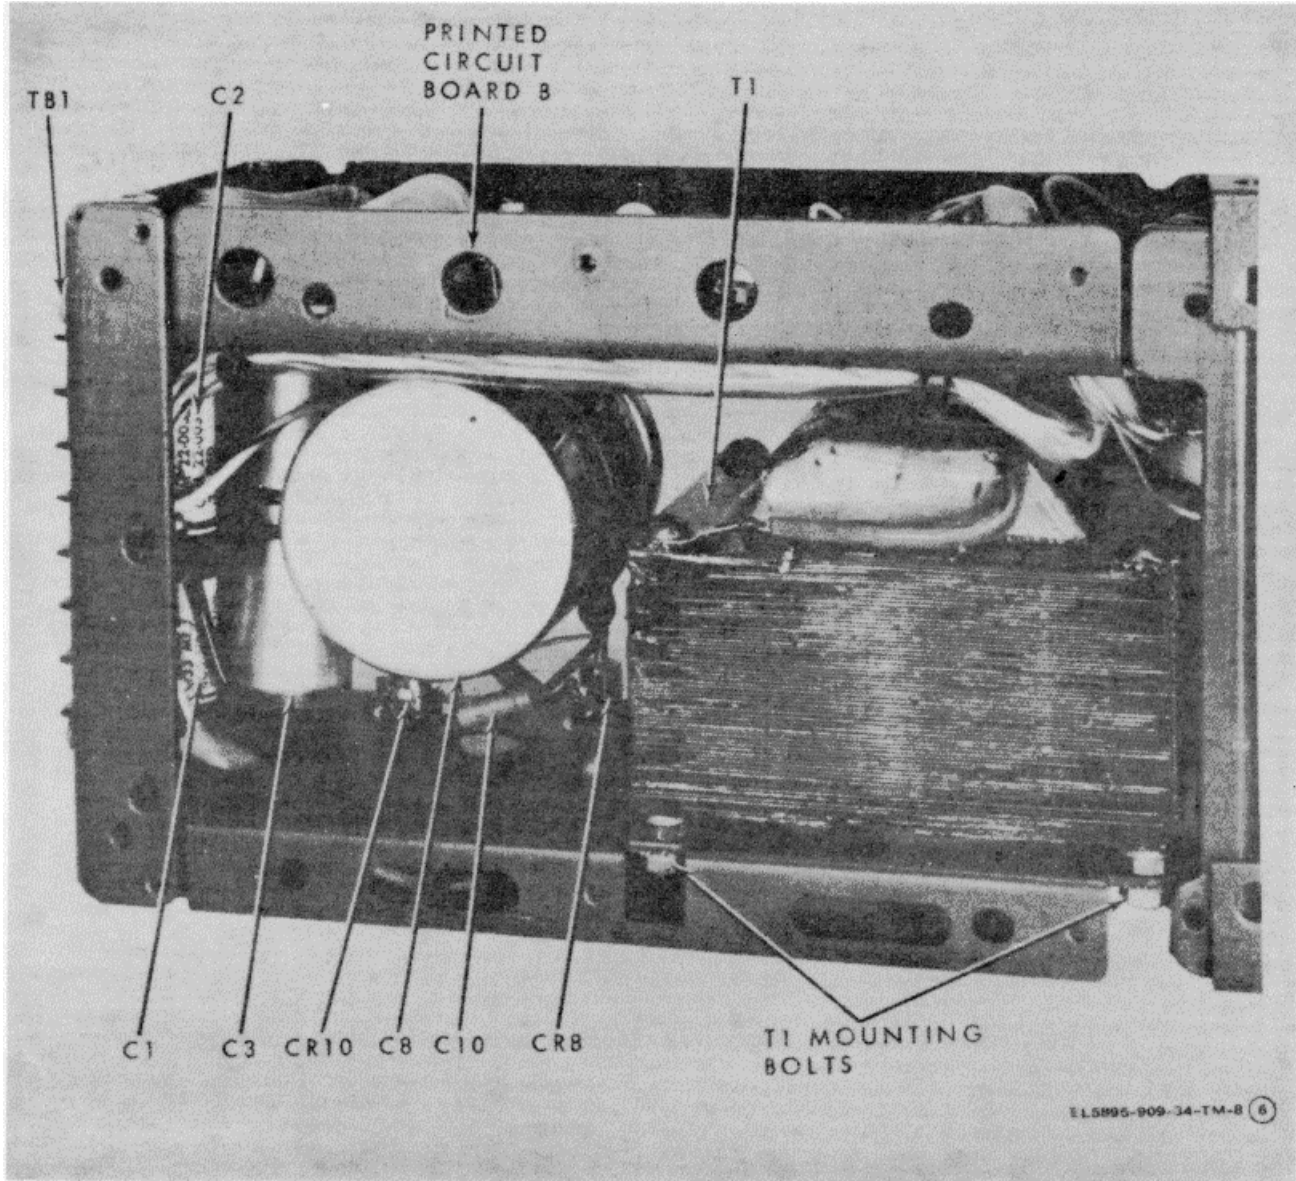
5 V dc power supply HTA-3A6PS3, parts location (sheet 6 of 6)
